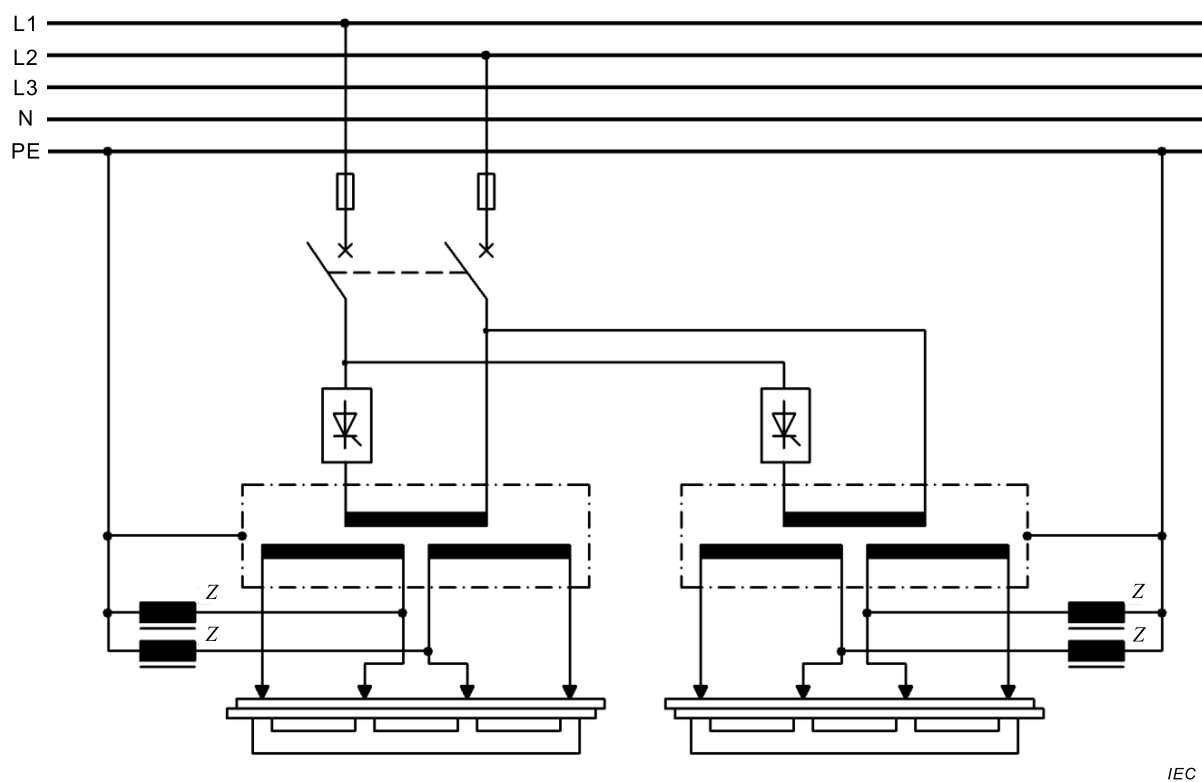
Example of protective conductor connected to welding circuits through auto-inductances
